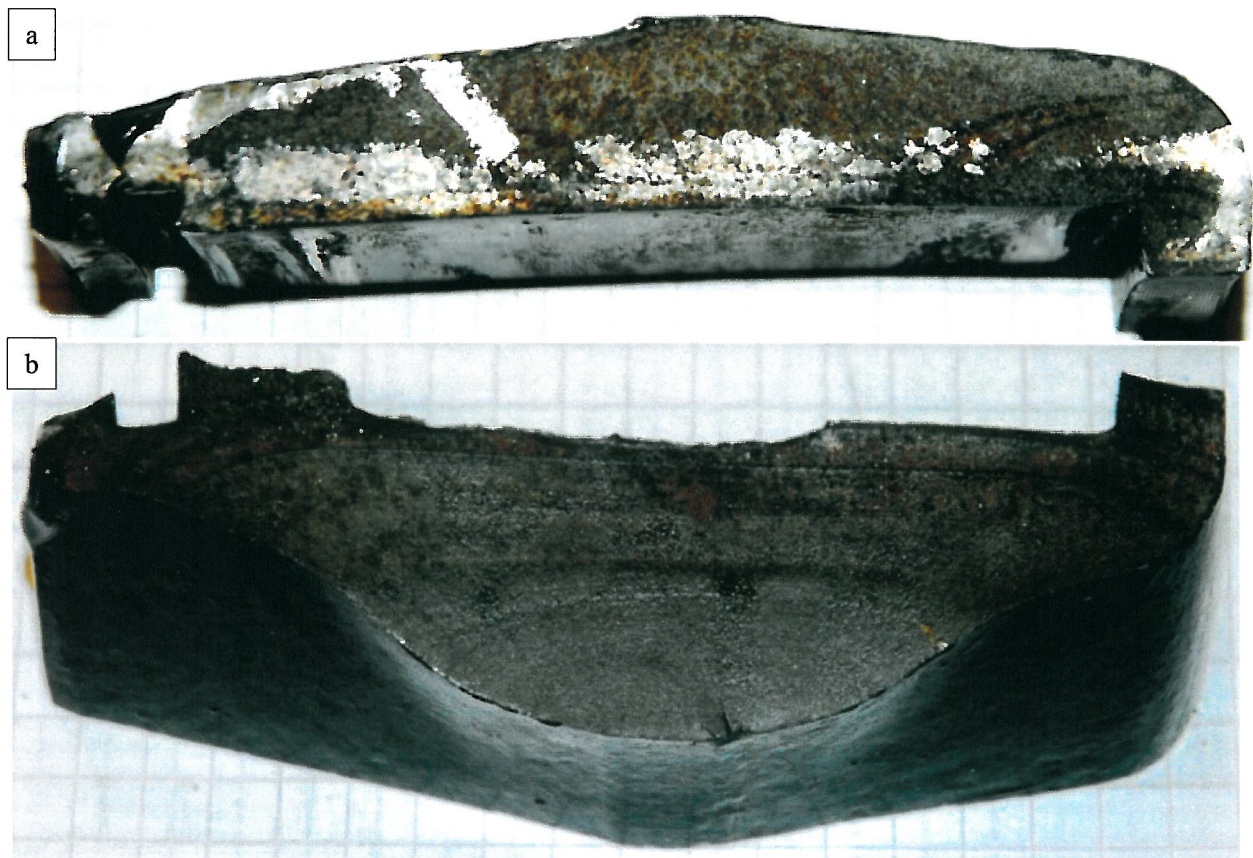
b: Fracture surfaces cut from the failed torque link.
